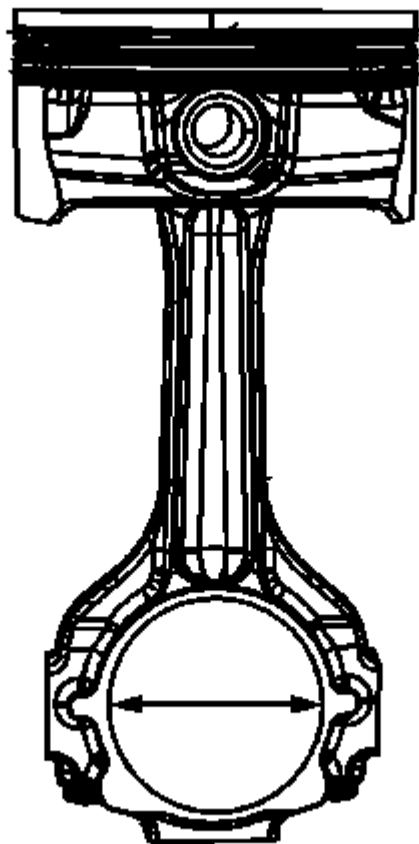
Measuring Connecting Rod Bearing Bore For An Out-Of-Round
